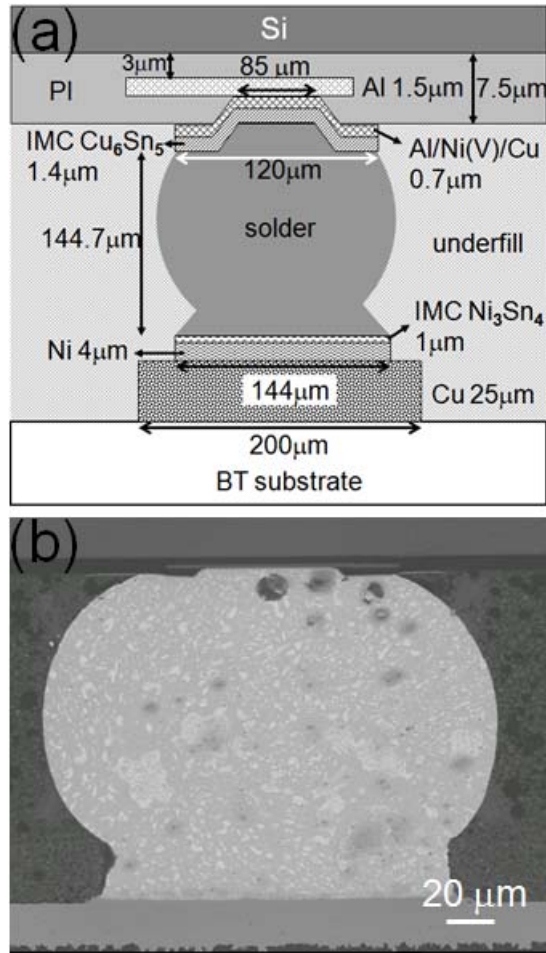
(a) The cross-sectional schematic shows the flip-chip solder joints from APack. (b) The cross-sectional SEM image of flip-chip solder joints as prepared by APack.
